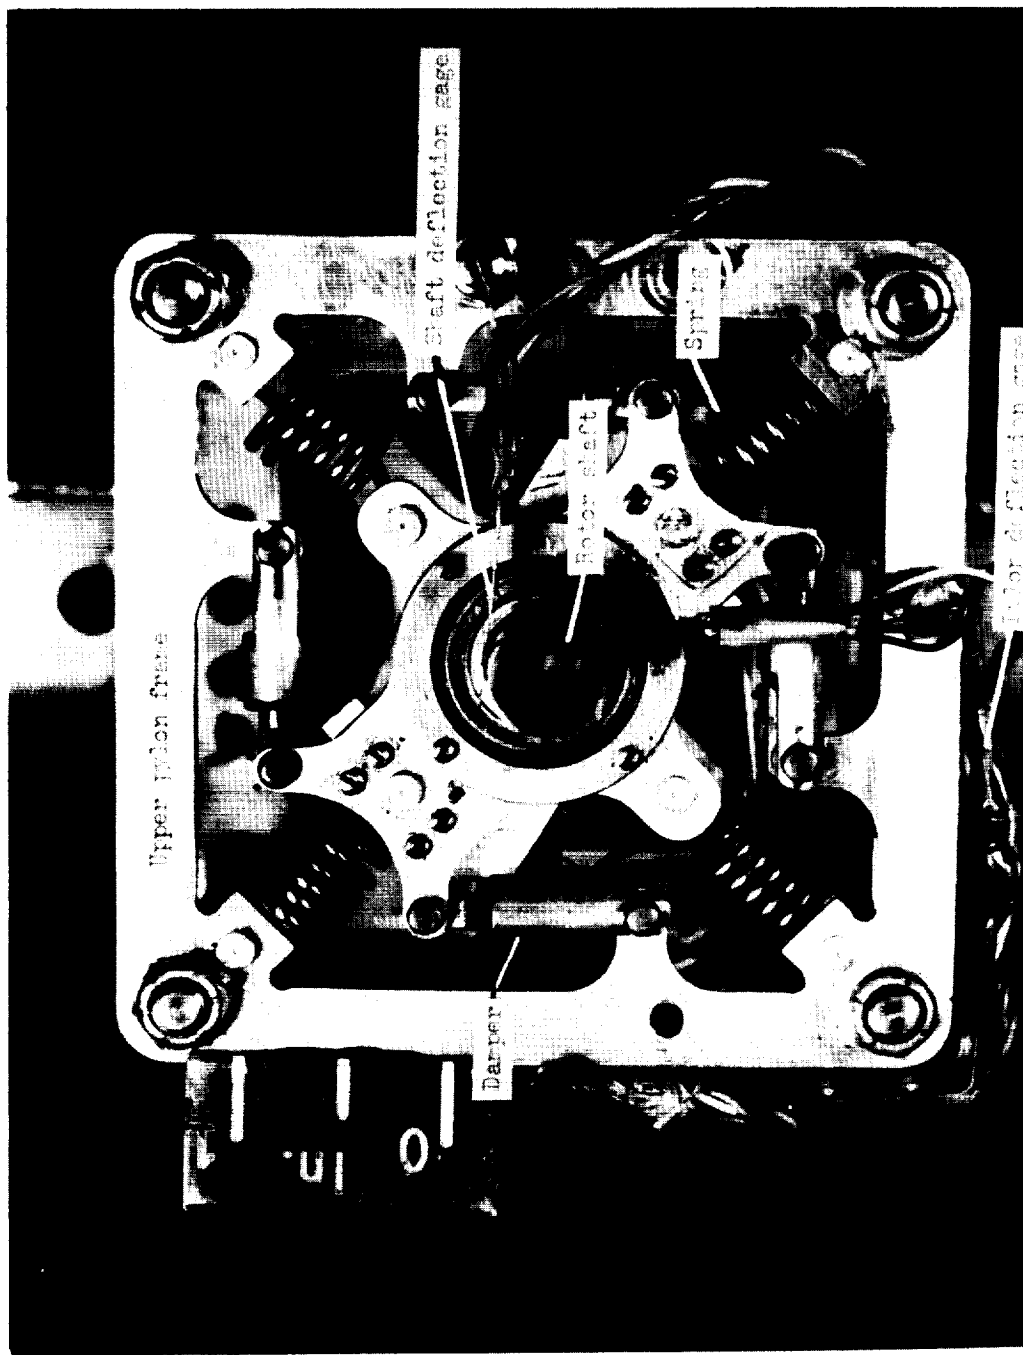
Top view of pylon and shaft showing details of spring and damper installations in upper pylon frame. L-95198.1.
